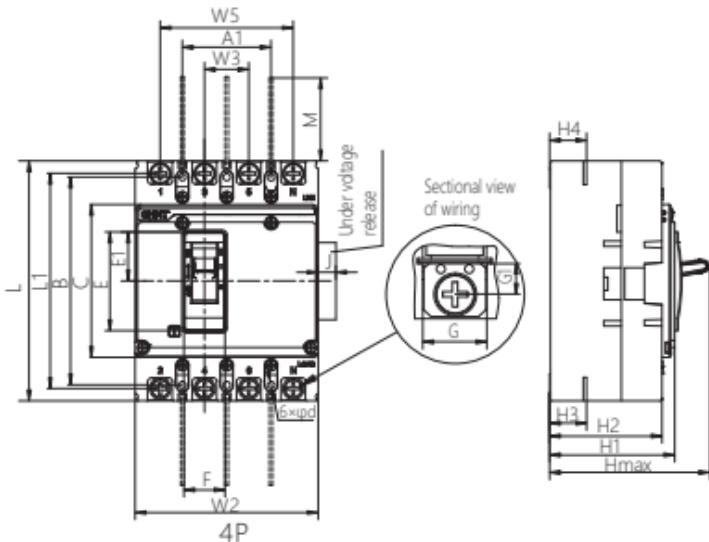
NXM-63~250 front-panel wiring overall and installation dimension
